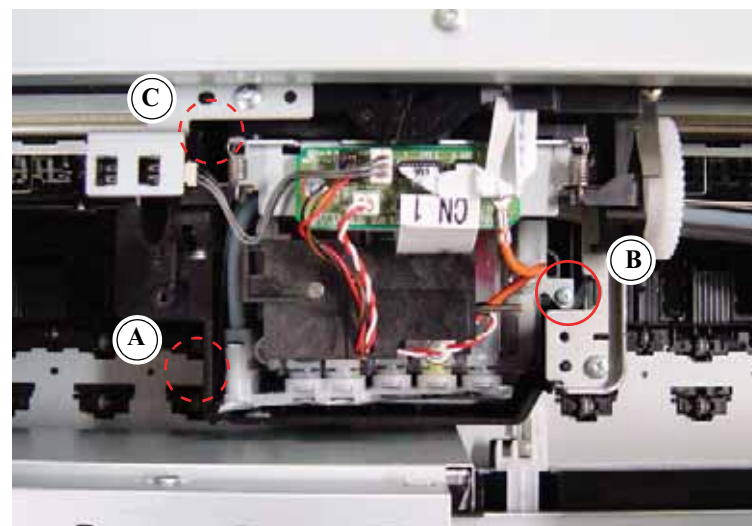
Screws Securing the [LEAF SPRING, LOCK, HEAD]
